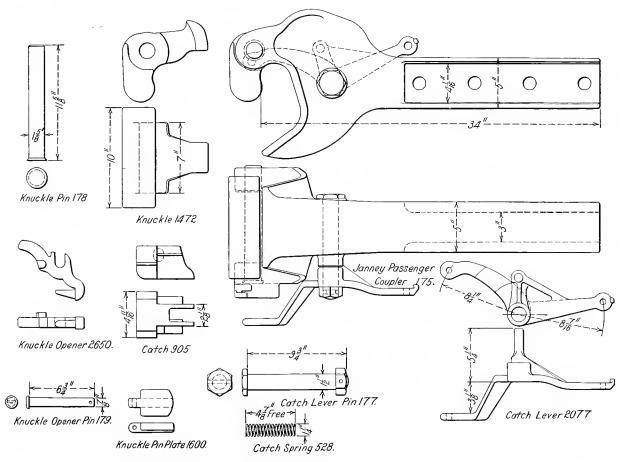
Janney Passenger Coupler No. 175 and Parts. McConway & Torley Company.
